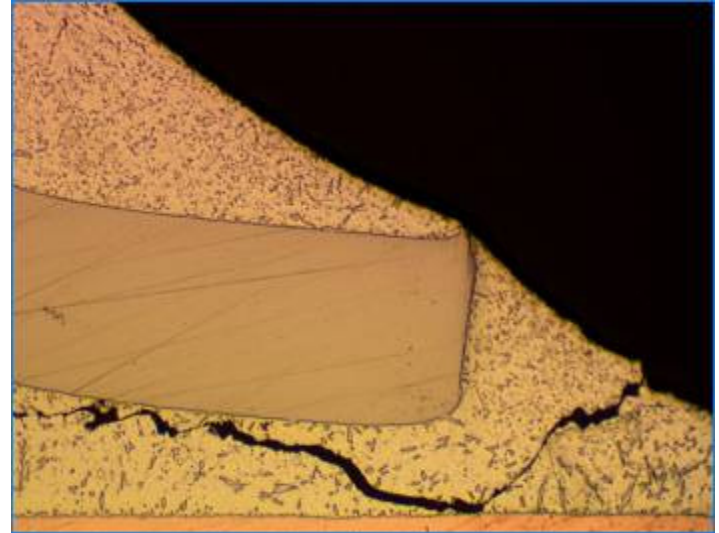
cross section, SN66, U61, right lead solder crack, 200xa
